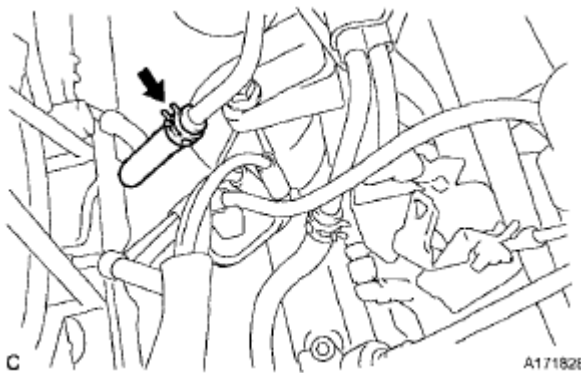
Locating No. 2 Oil Cooler Hose And Claws
